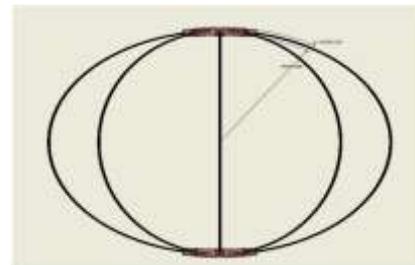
Gimbal 3-d Modal (Nut and Bolt Section)
